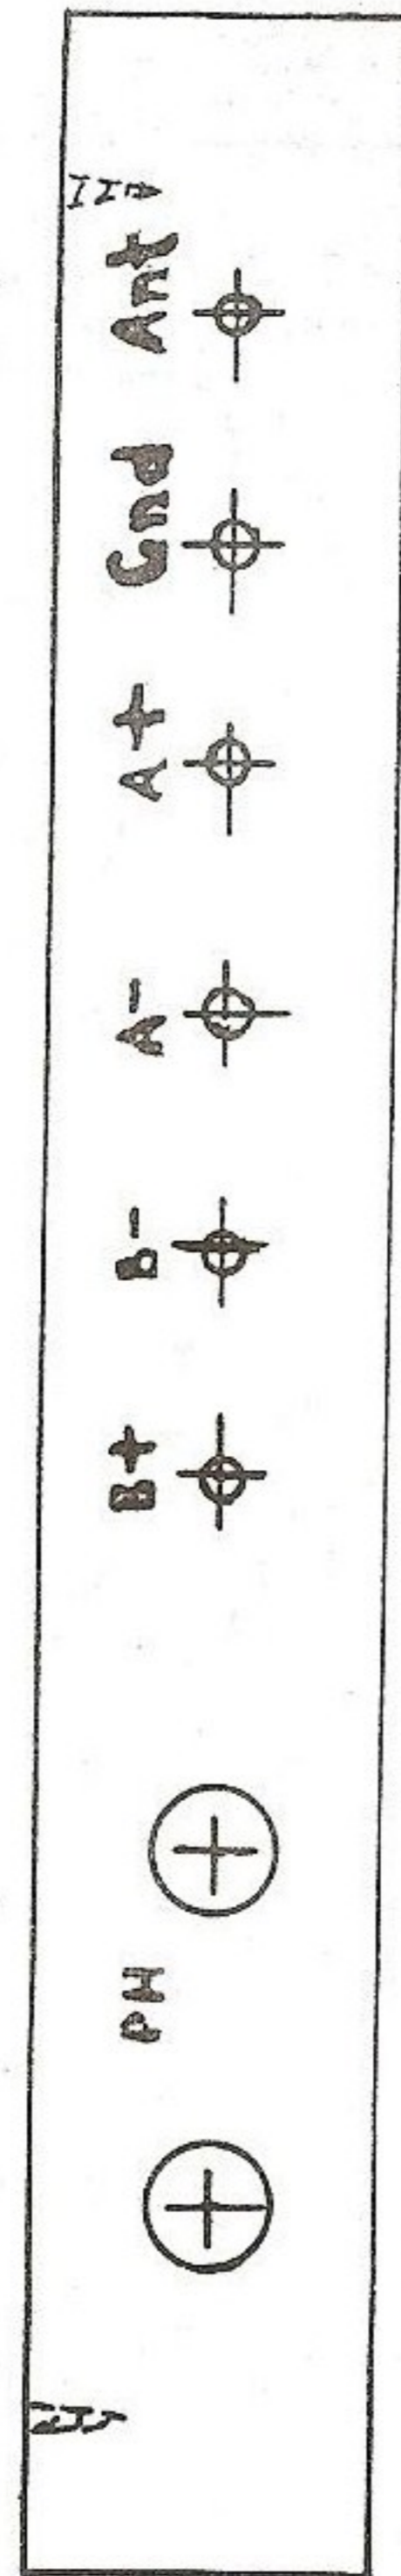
Drilling the 3/4 x 5/8 base strip.
